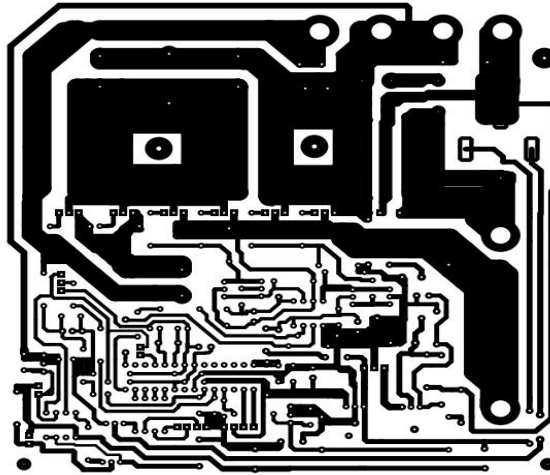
PCB OF THE MPPT BOTTOM VIEW
